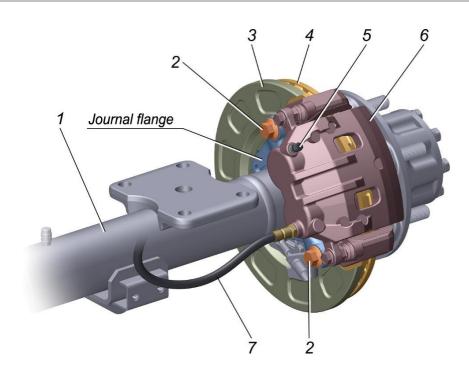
Rear wheel brake installation: 1 – rear axle housing; 2 – bolts; 3 – left parking brake; 4 – brake disc; 5 – bypass valve with cap; 6 – left disc brake; 7 – brake hose;
